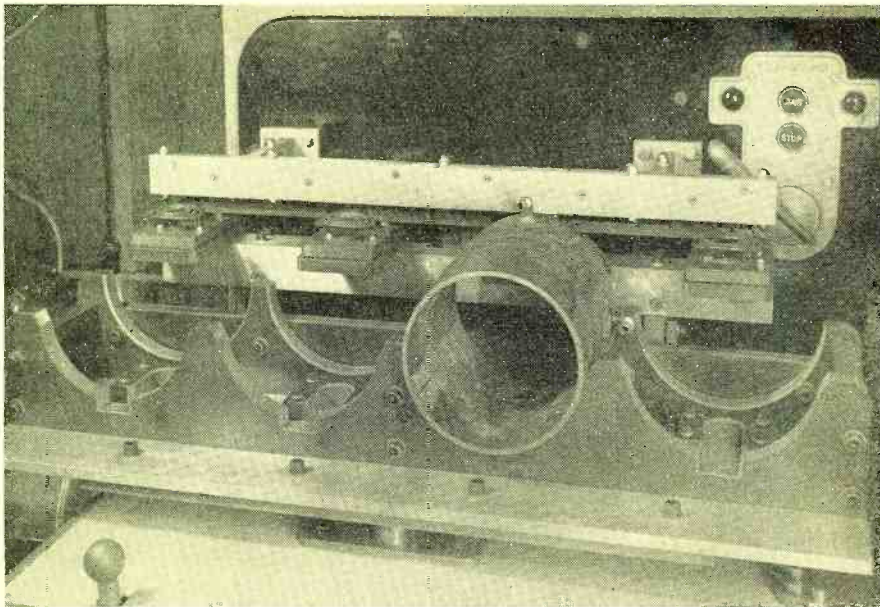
Spiral-type work-coils for brazing suction fittings into compressor housings.
